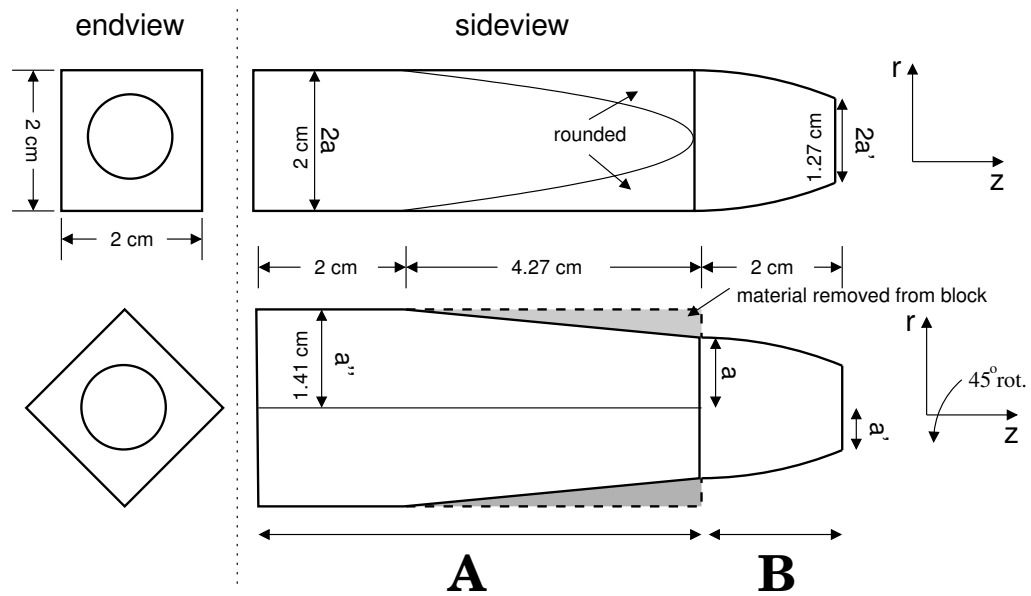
A sketch of the light guide. Top: side view. Bottom: side view but rotated 45° about z .
